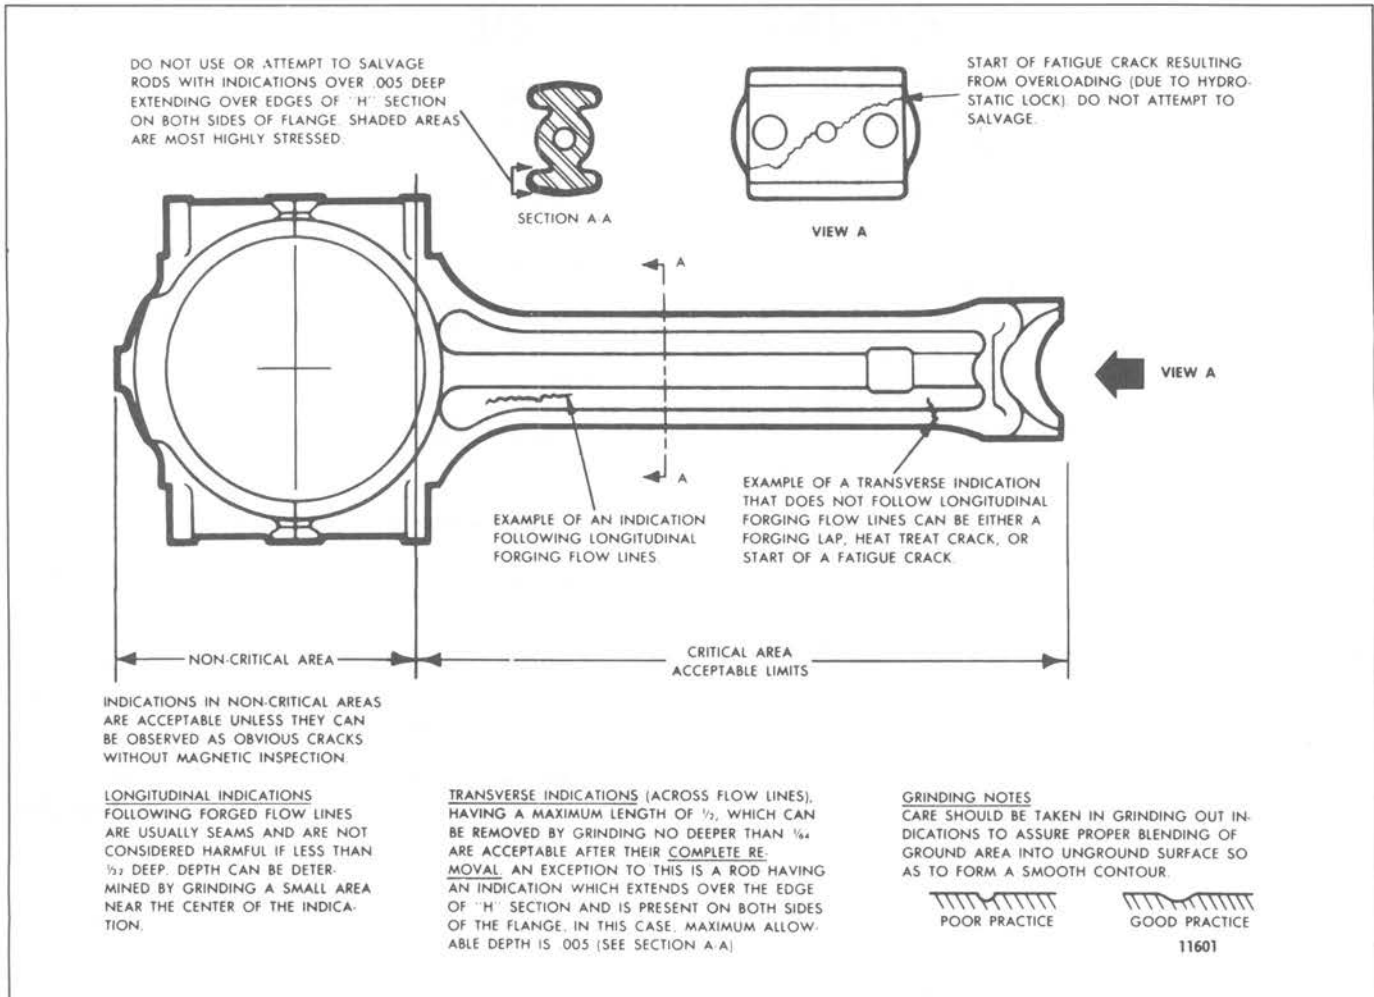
Magnetic Particle Inspection Limits for Connecting Rod
